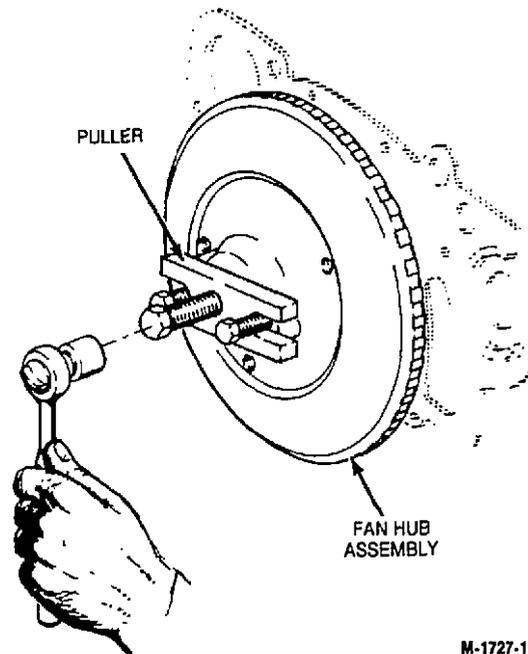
PULLING THE FAN HUB ASSEMBLY
